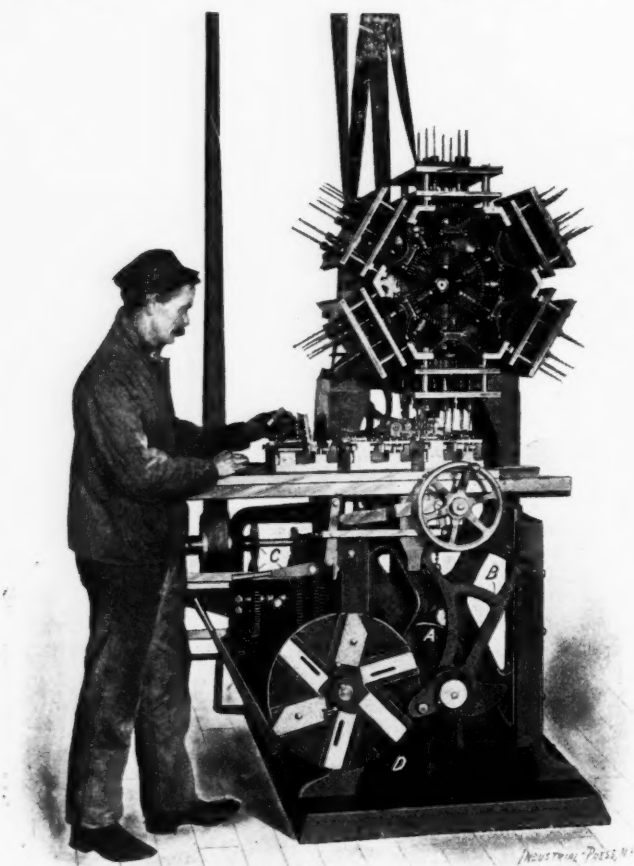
Automatic Multiple Spindle Drill Press, Front View.
